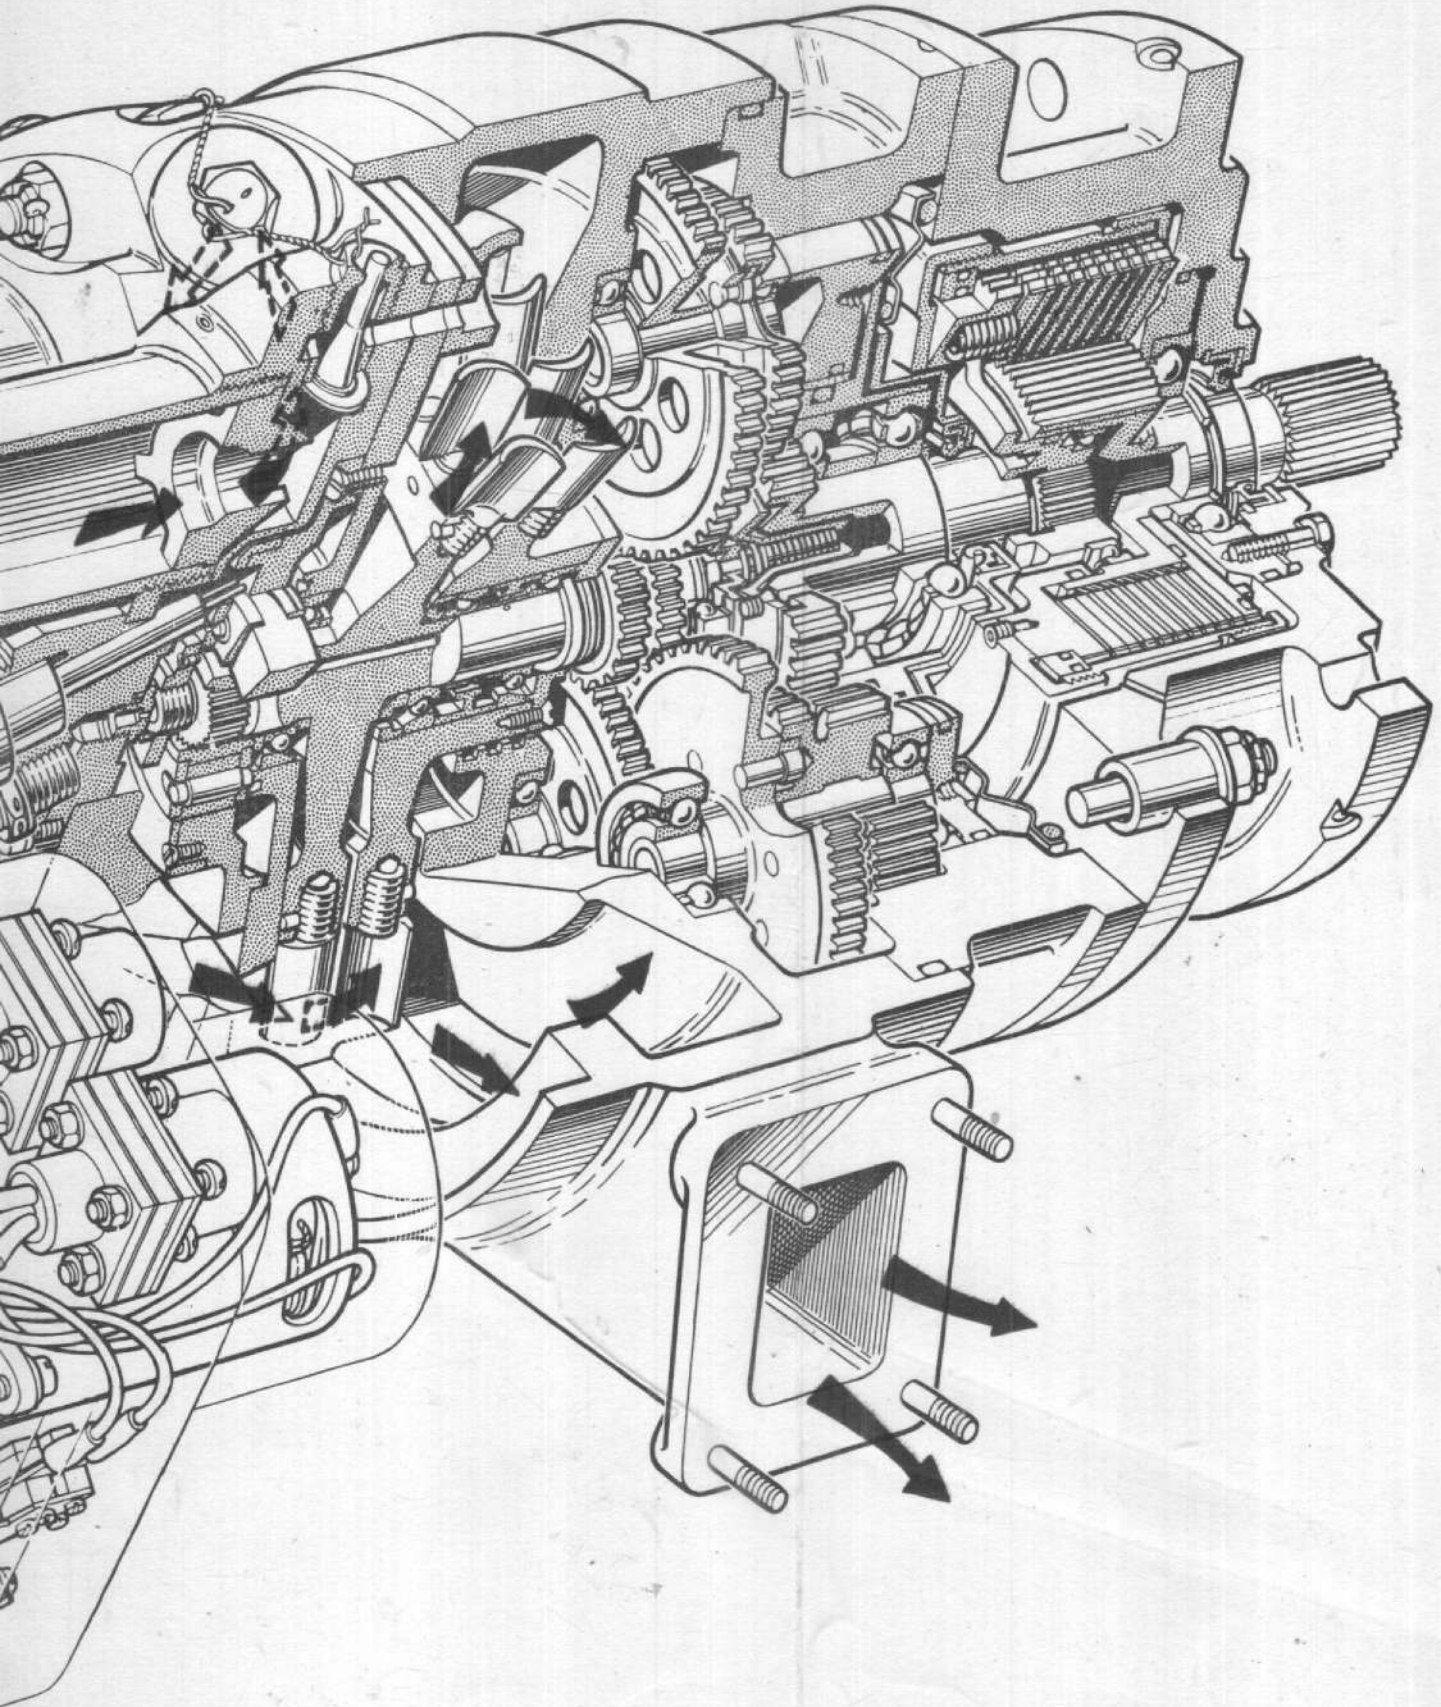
SECTIONAL PERSPECTIVE VIEW
